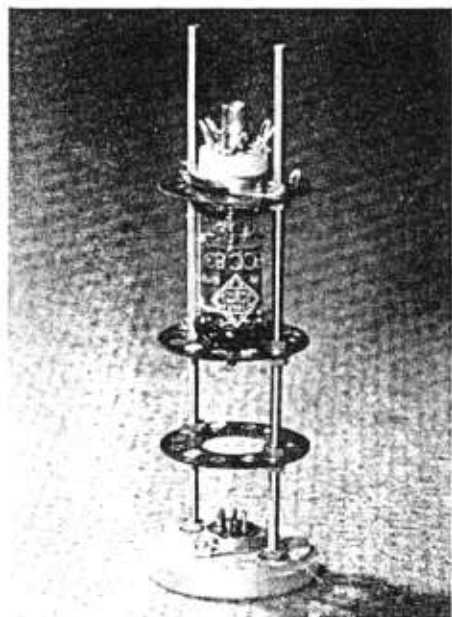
This picture shows the basic frame assembly, with spacers carrying eyelets which act as junction points for soldering.
